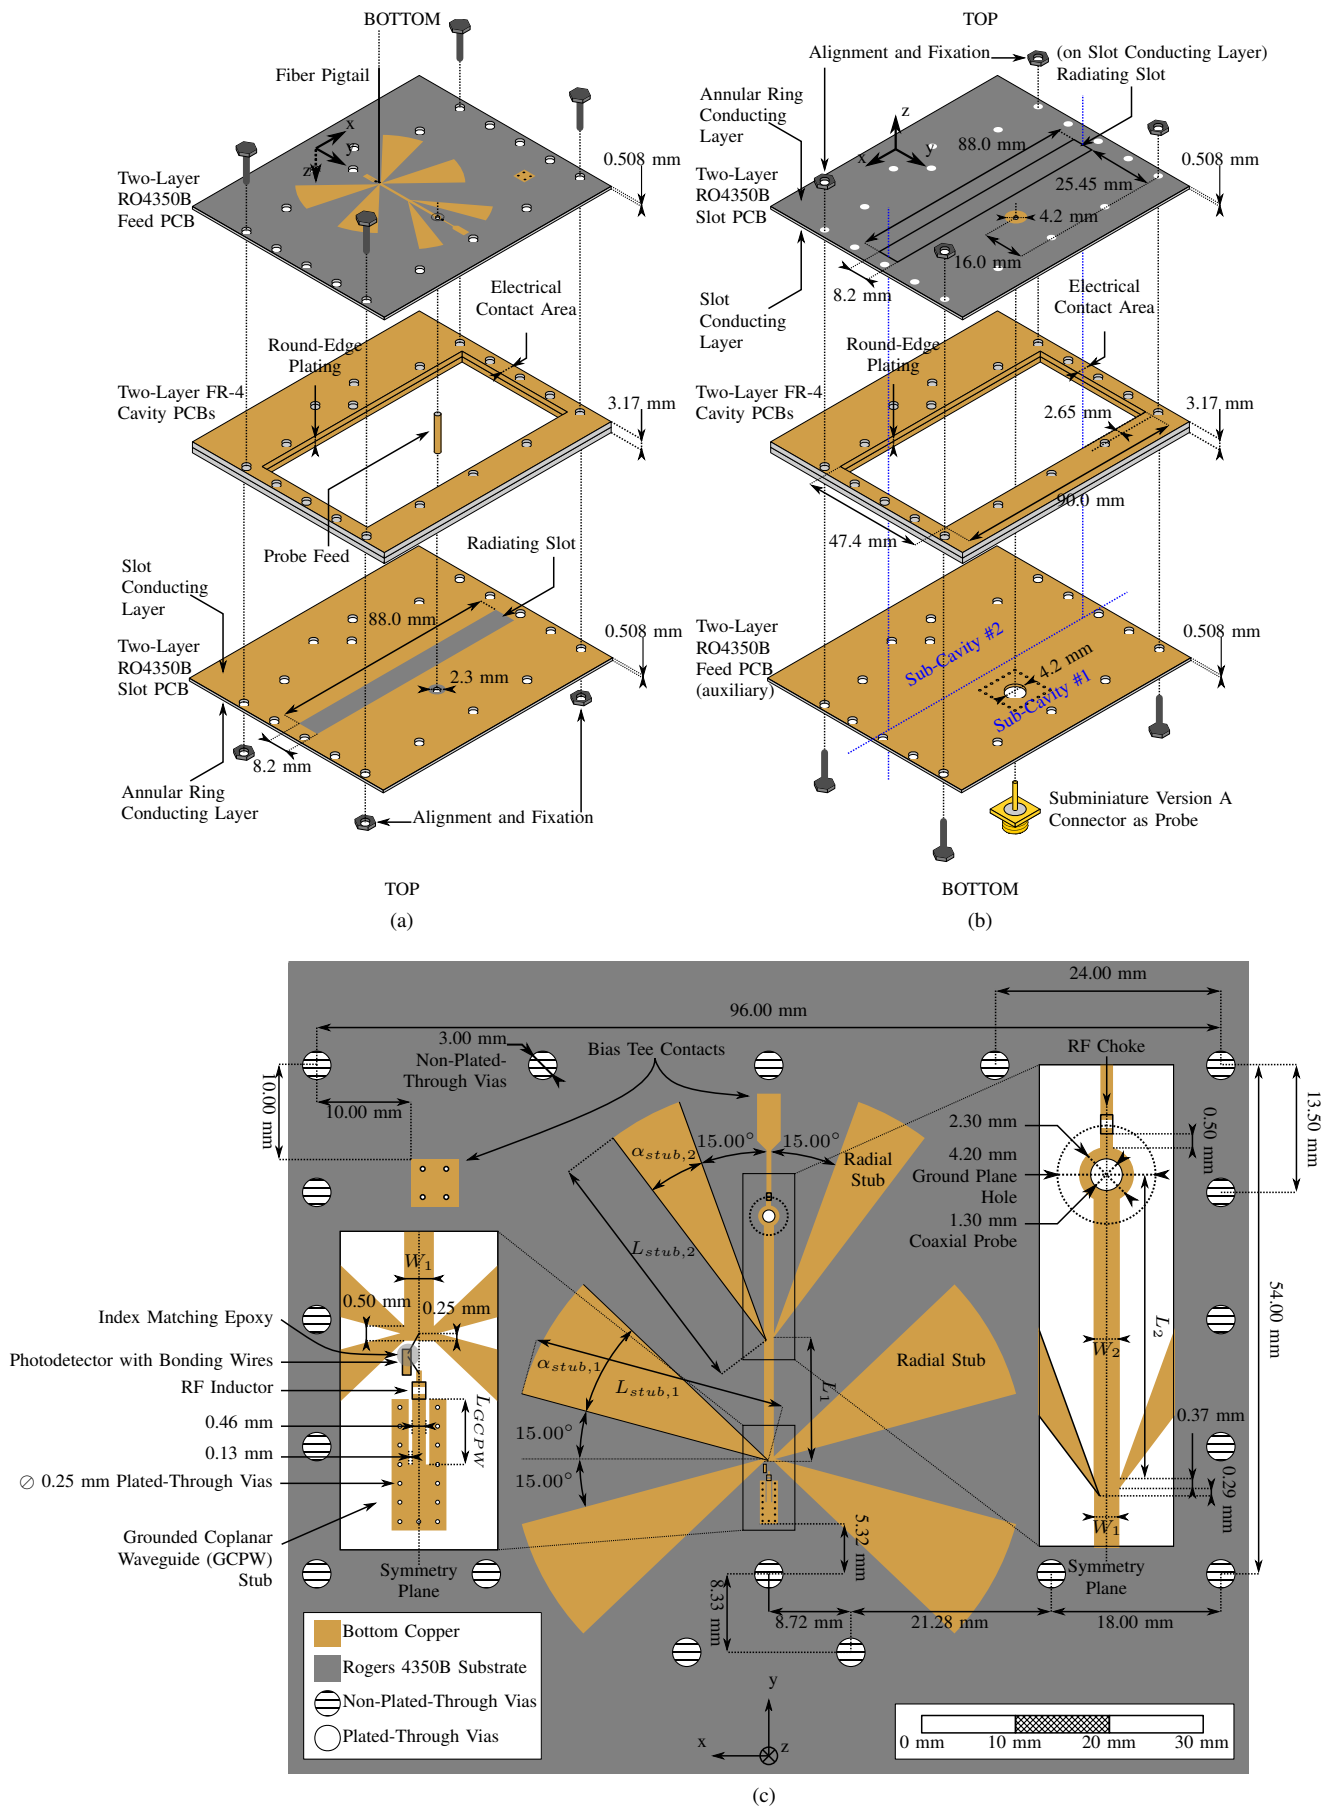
(a) Exploded bottom view of the fully assembled downlink remote antenna unit. (b) Exploded top view of the air-filled substrate-integrated-waveguide cavity-backed slot antenna. (c) Detailed structure of the PCB that contains the optoelectronic conversion circuit.
